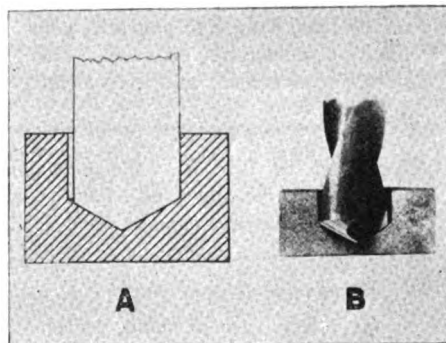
Correct Grinding Prevents Breaking Drill.
